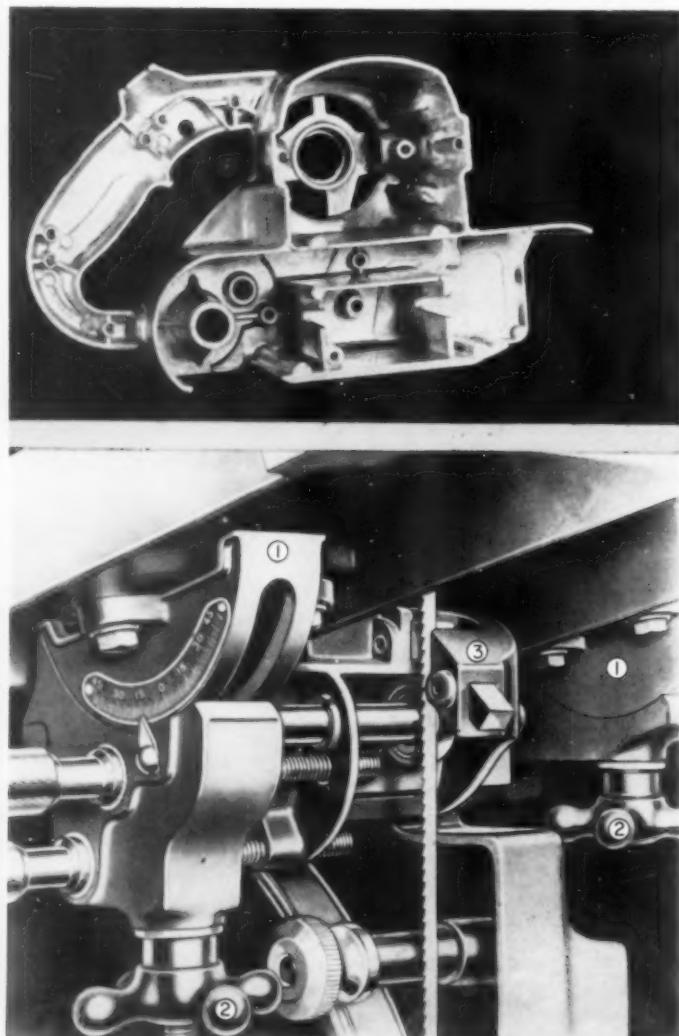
(Top left) Light weight and reduced assembly costs result from use of this aluminum die casting for the housing of a portable belt sander.
